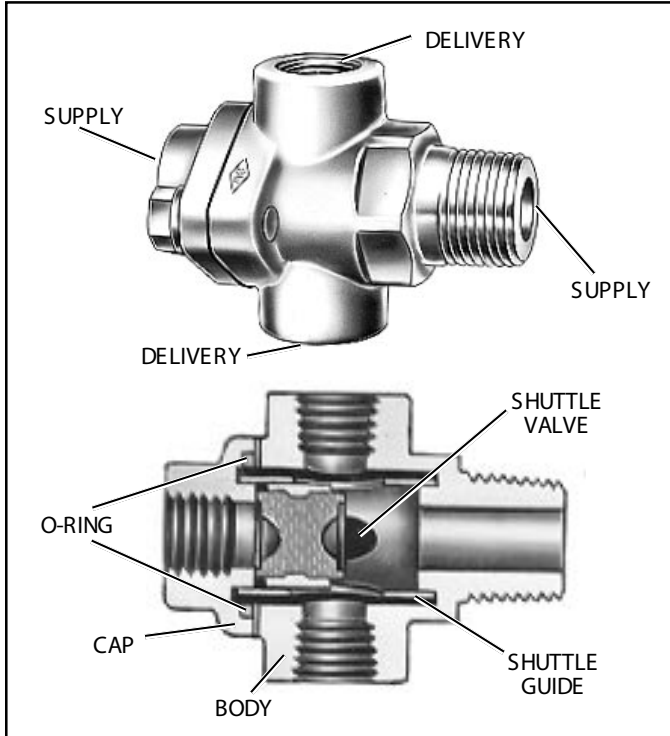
DOUBLE CHECK VALVE (SHUTTLE TYPE)
